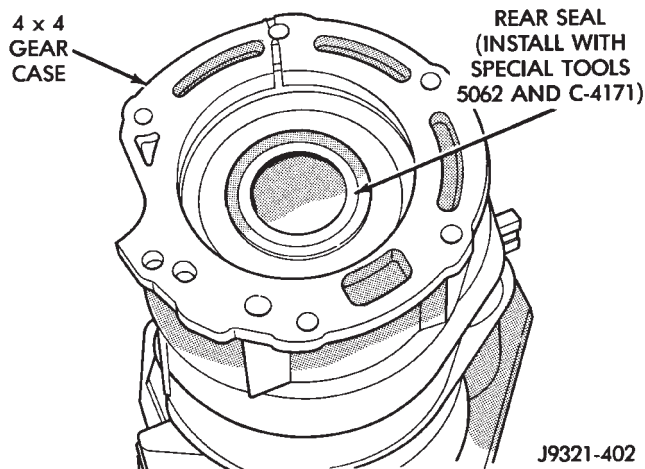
Rear Seal Installation (In 4x4 Gear Case)
